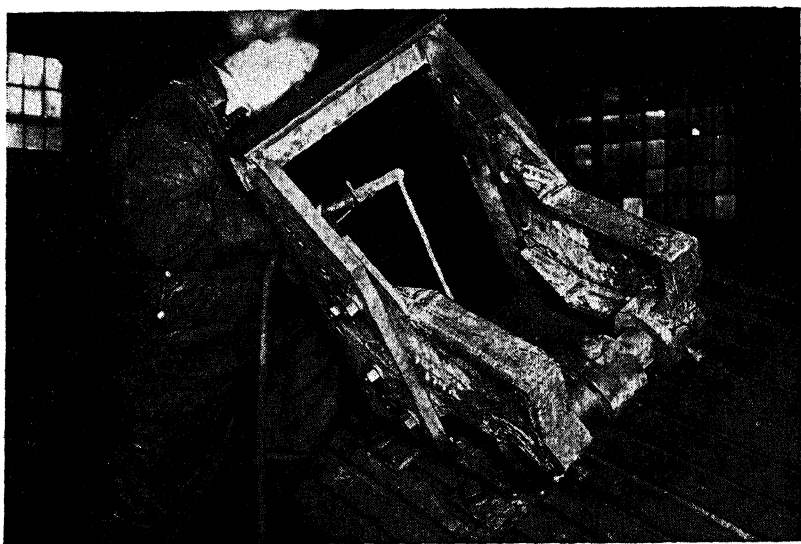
This positioning jig and fixture permits the use of large electrodes for faster welding. Costs are further reduced in the manufacture of this machine part by using bending to fullest extent possible. (Heavy plate is bent hot.)
